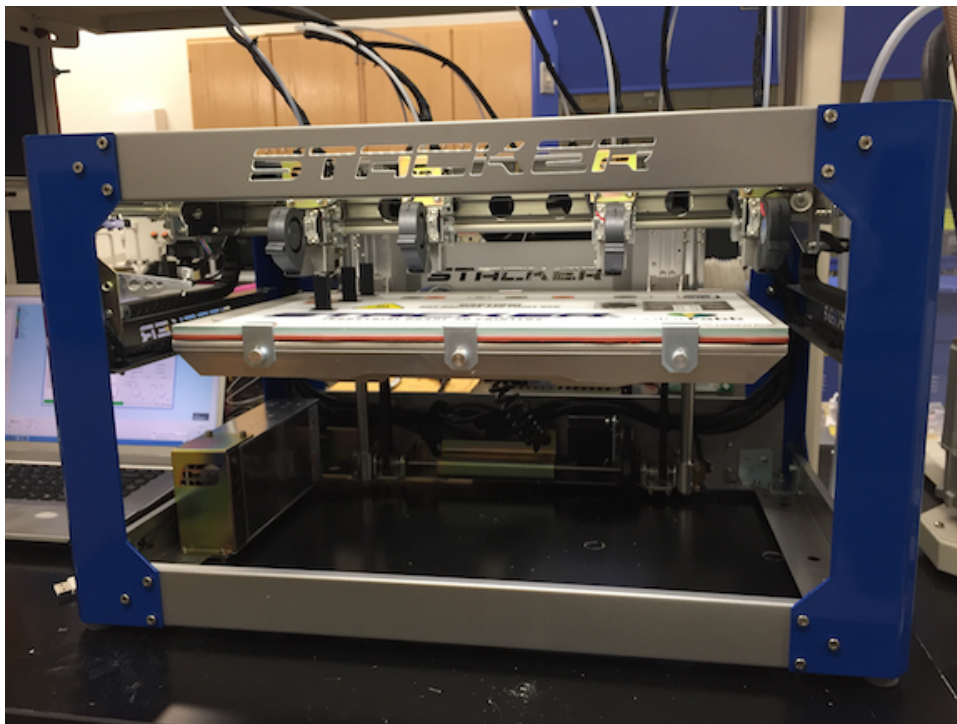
Stacker 500 desktop material extrusion 3D printer.
